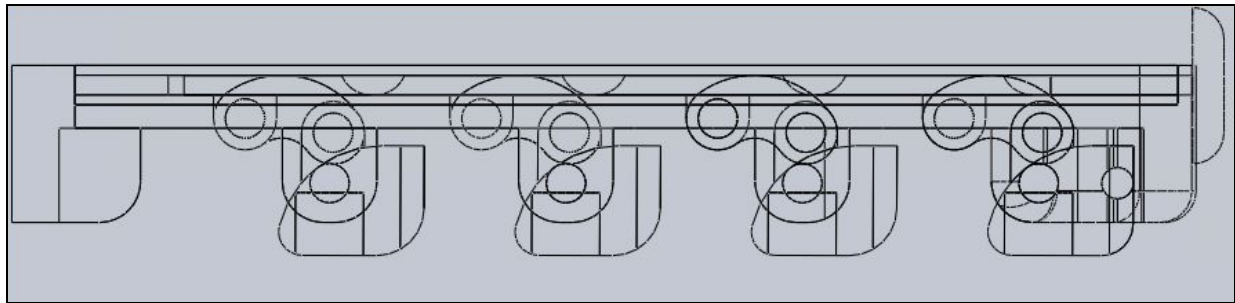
Cross-section wireframe view of deployed initial retraction mechanism (spikes not shown)
